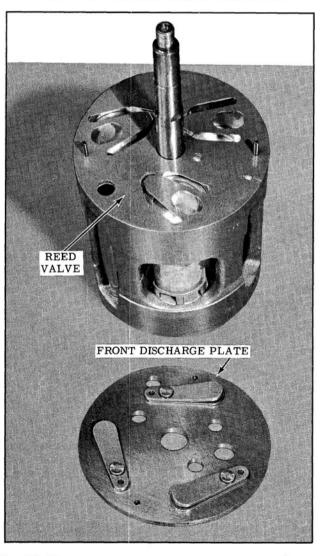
Front Head Discharge Plate and Reed Valve
